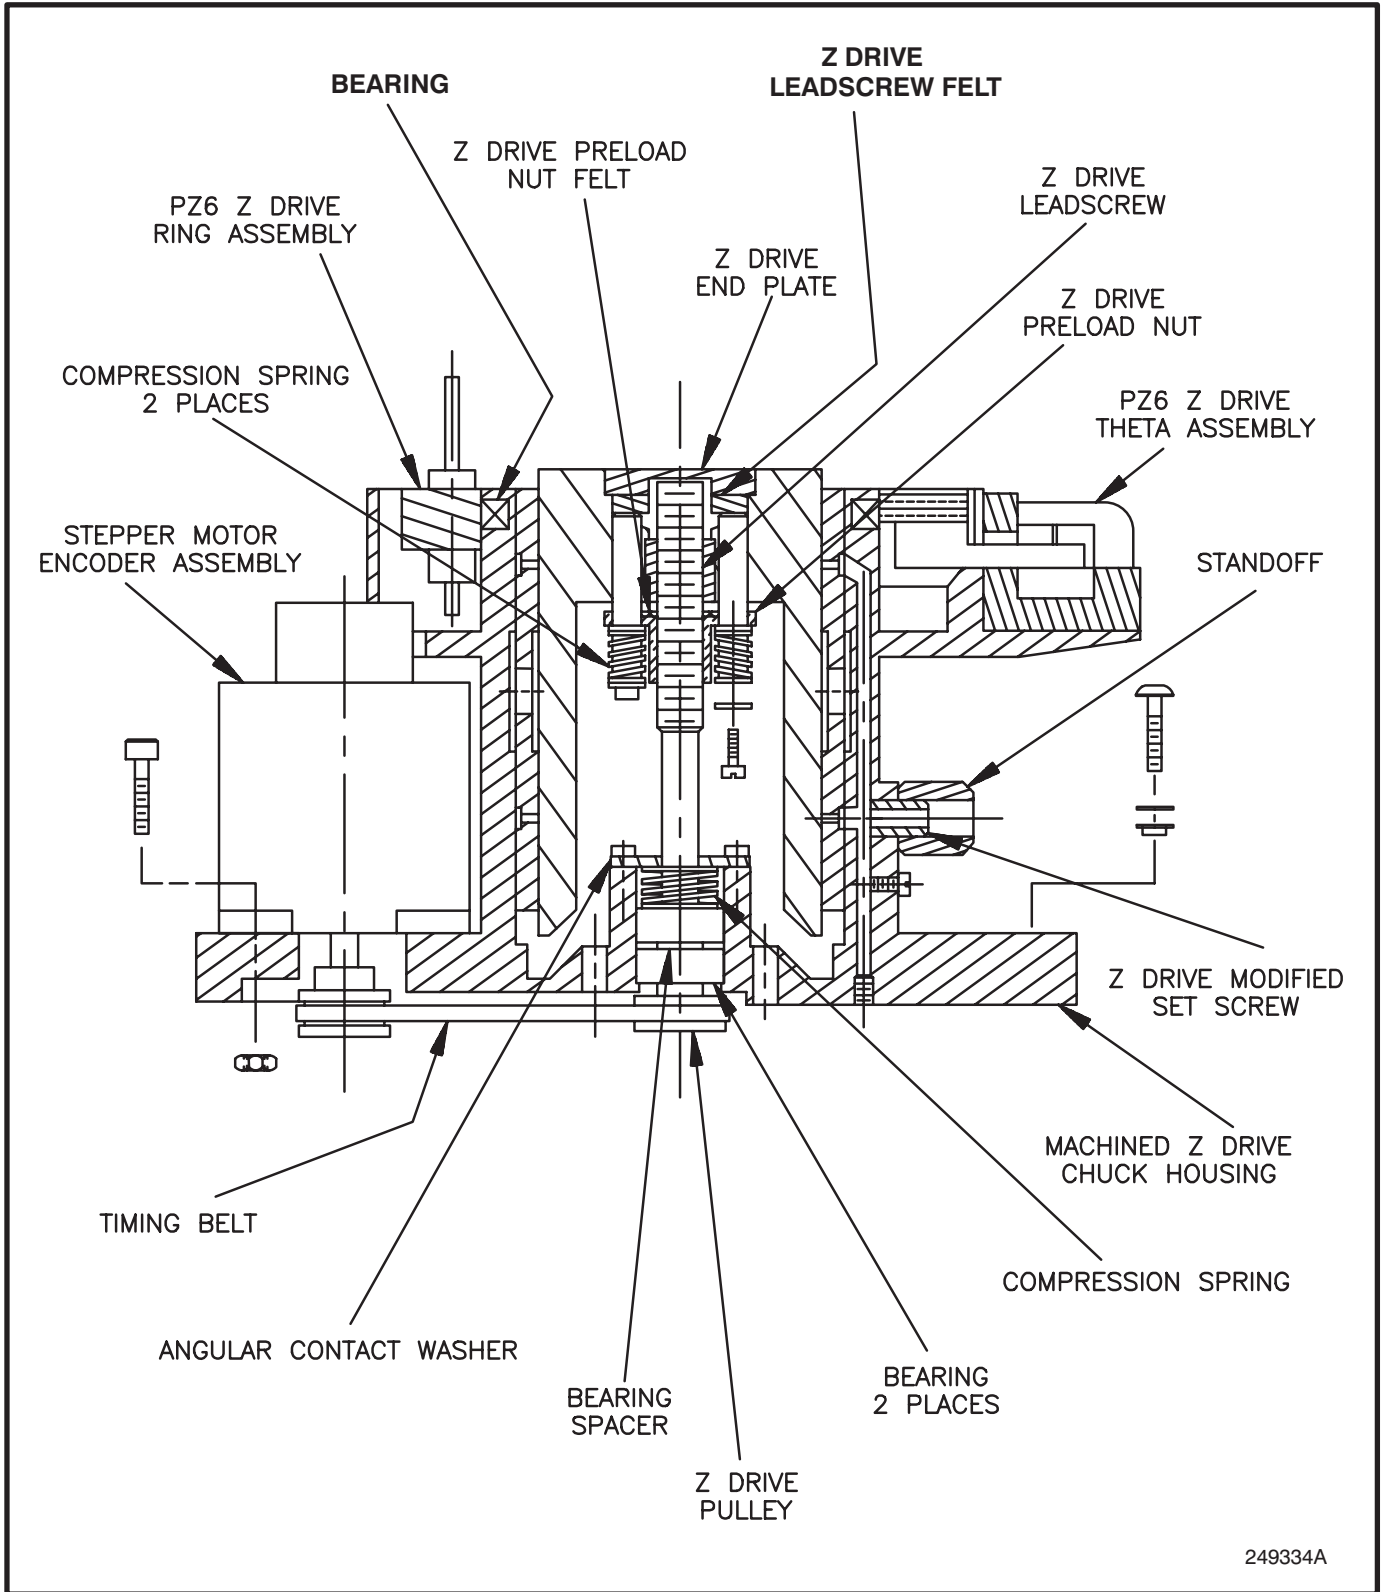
B: ASSEMBLY DETAIL – CUTAWAY VIEW
